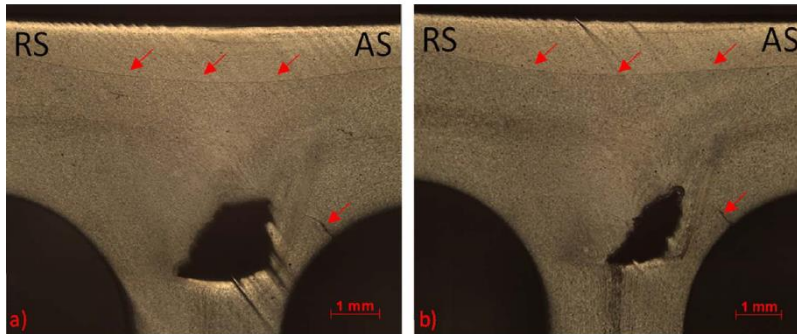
Morphology of the AA 5083-H111 T-lap welds for LP5-1 (a) and LP5-2 (b). RS-retreating side, AS-advancing side.
